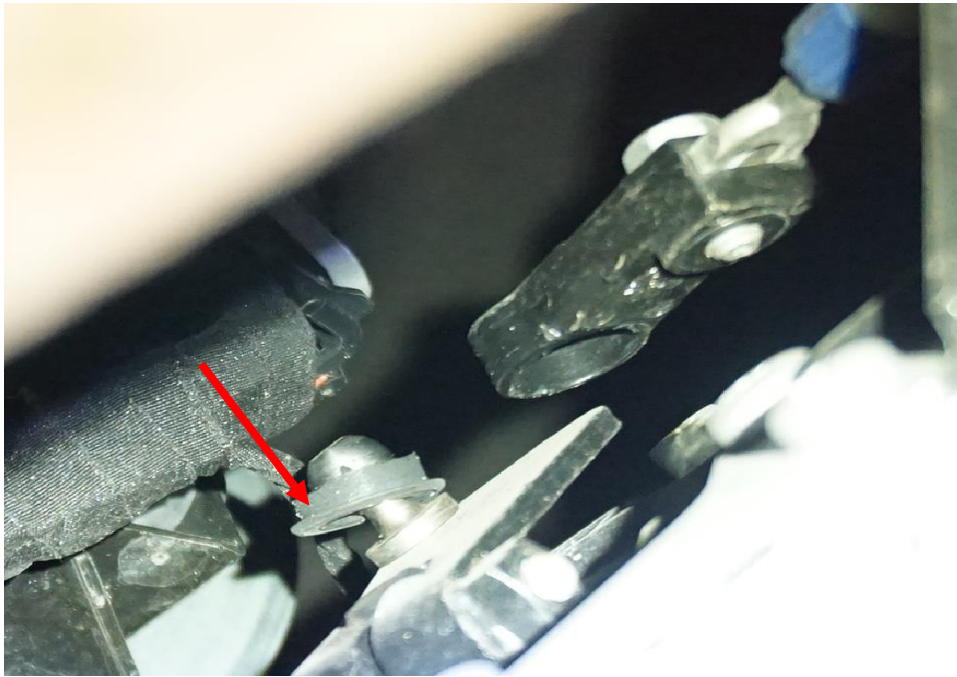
shows a close up view from the underside of the engine compartment of the Insured Vehicle at the time of my inspection. We noticed that there was a broken piece of rubber material on the connecting ball of the gearbox (arrowed). The gear shifting cable connector that was dislodged from the gearbox of the Insured Vehicle, was fitted at the bottom right side in the engine compartment of the Insured Vehicle.
